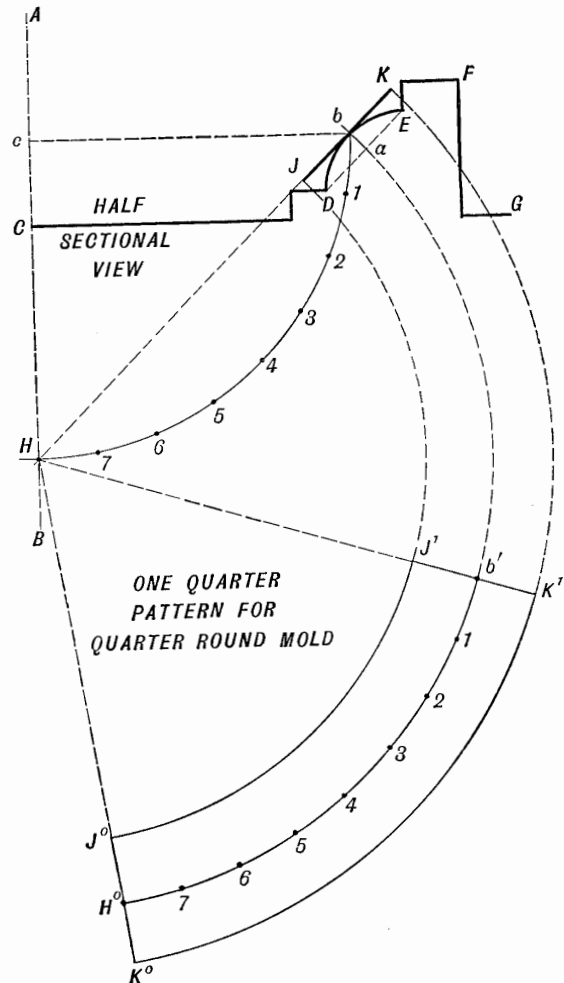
Pattern for Quarter Round Mold in a Circular Panel
